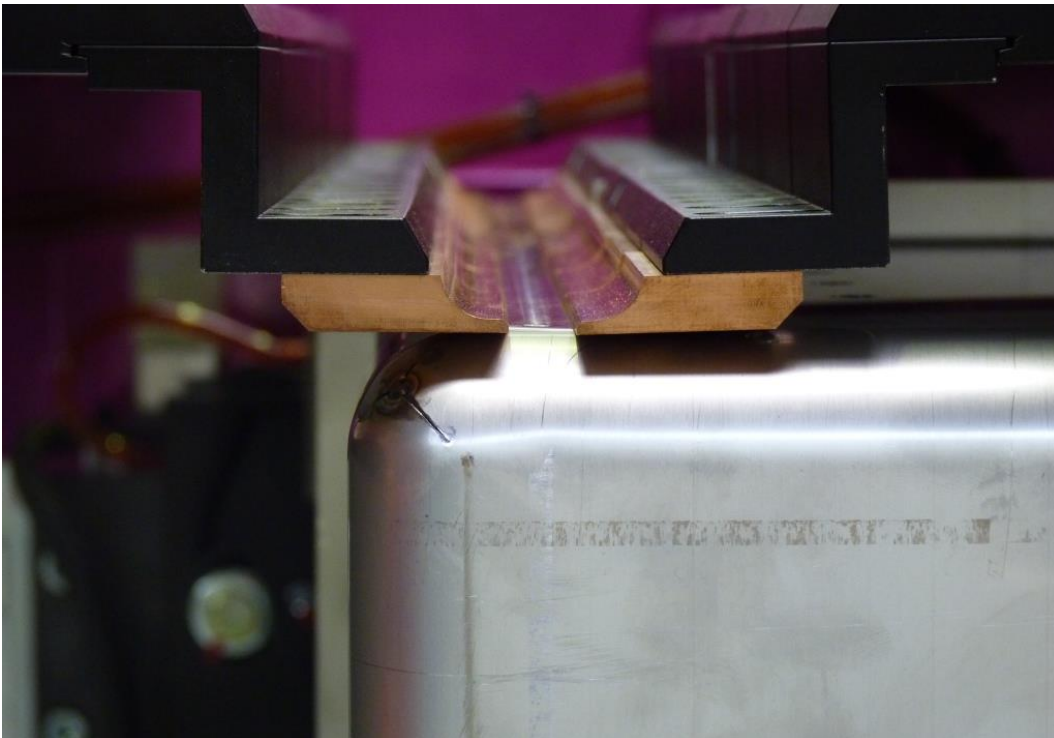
Clamped box with precision outside clamping fingers. The seam is just visible.
